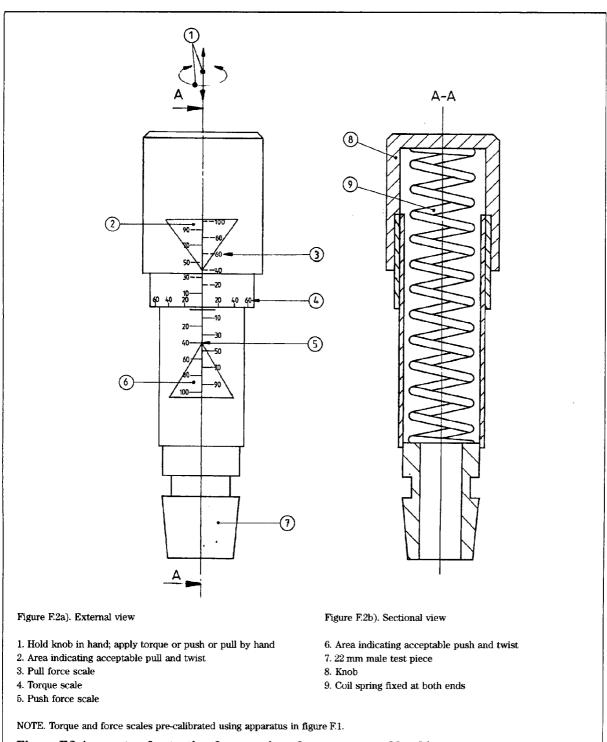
Apparatus for testing for security of engagement of latching connectors (method 2 -hand-held)
